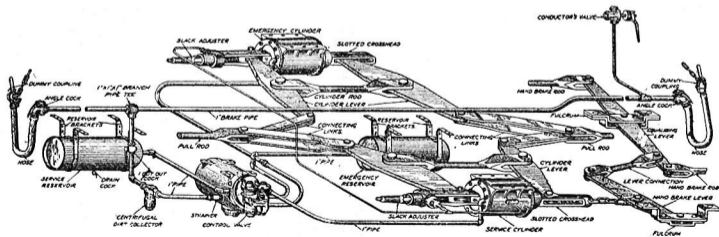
PC Passenger Brake Equipment. Cylinders Pointing in Same Direction
